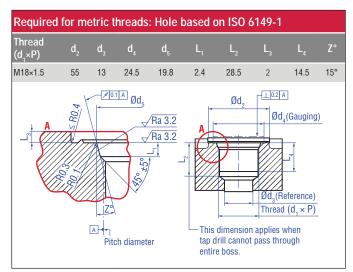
Notice for threaded flange M18×1.5-6g based on DIN ISO 6149-1
